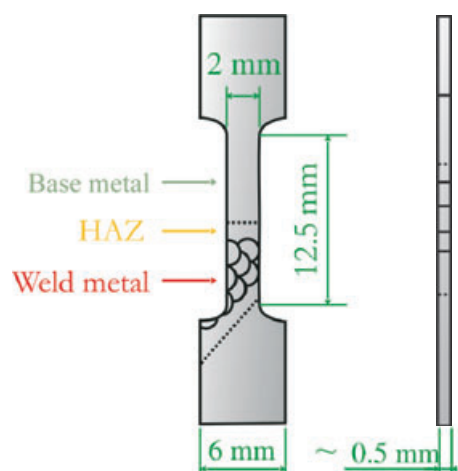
Small samples used for the *in situ* tests, cut from the centre part of the weld (cap and root were removed). Note the HAZ region along the straight bevel
